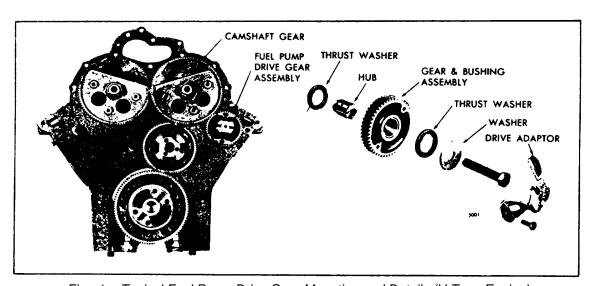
Typical Fuel Pump Drive Gear Mounting and Details (V-Type Engine)
